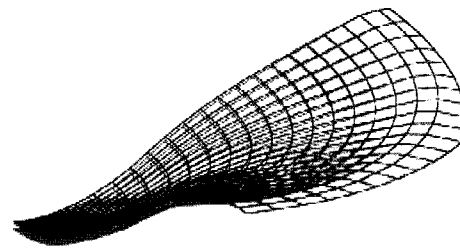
Unloaded shape of the sheet after trimming at the punch stroke of 20.32mm
